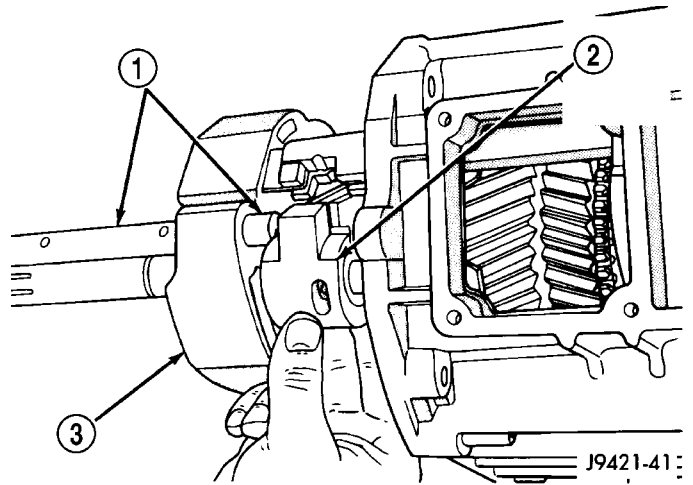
SHIFT SHAFT LEVER AND BUSHING
